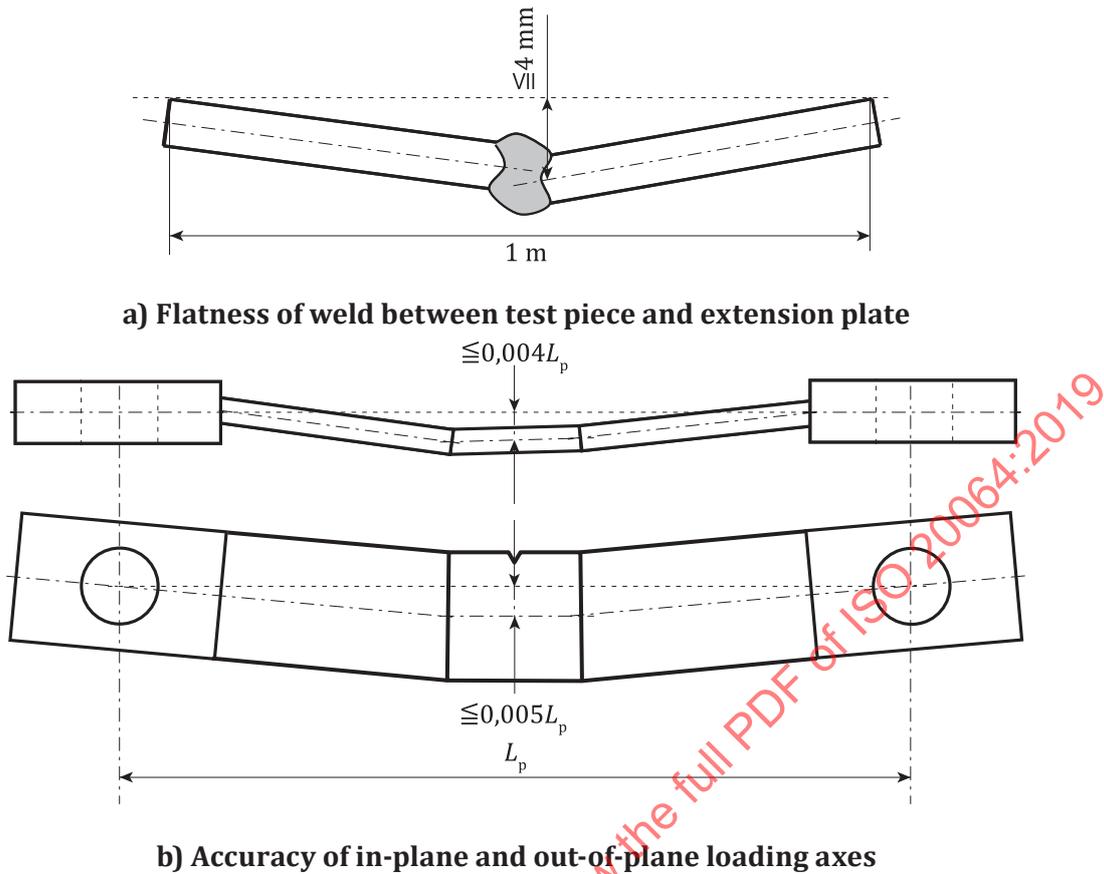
Dimensional accuracy of weld between test piece and extension plate
